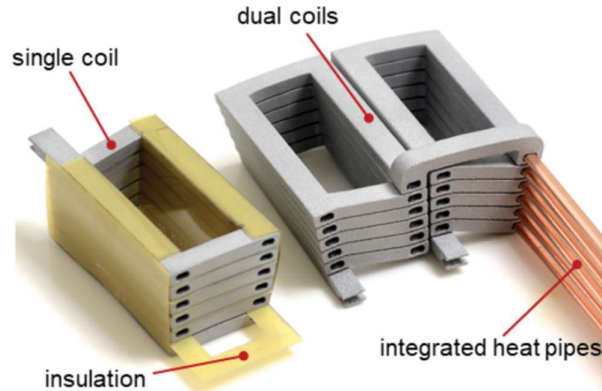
AlSi10Mg coils integrated with heat pipes [15]
